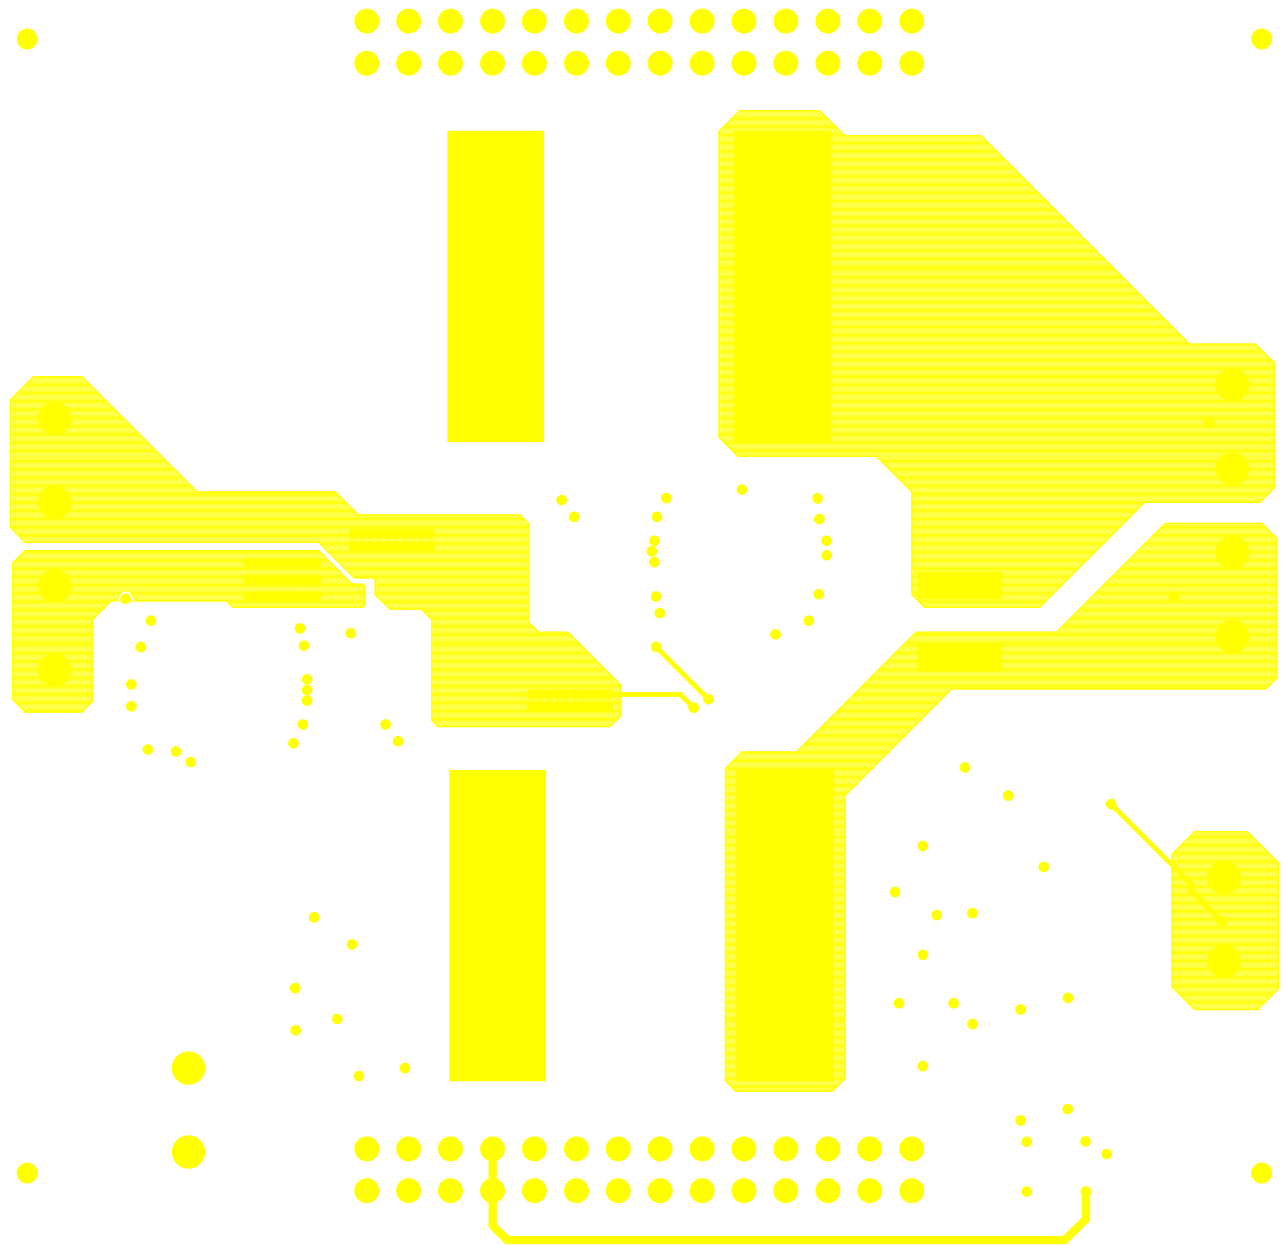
PCB layout bottom layer of SSB hardware prototype in Chapter 4.
